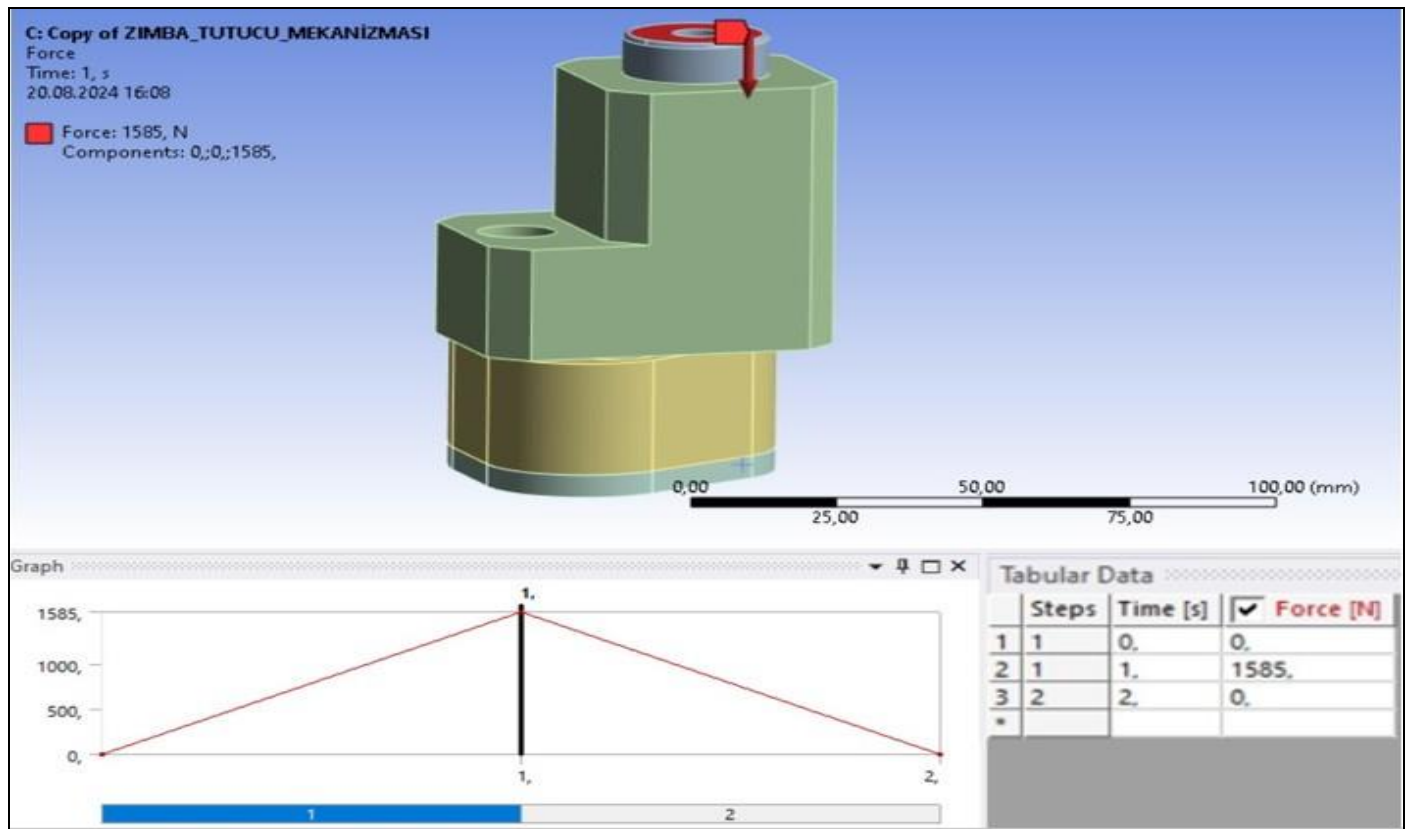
Operating Mechanism of the L-Shaped Punch Holder
